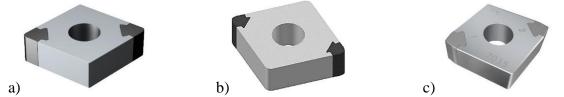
Cutting tool geometries – a) conventional (radius) geometry, b) Wiper [3], c) Xcel (4)
